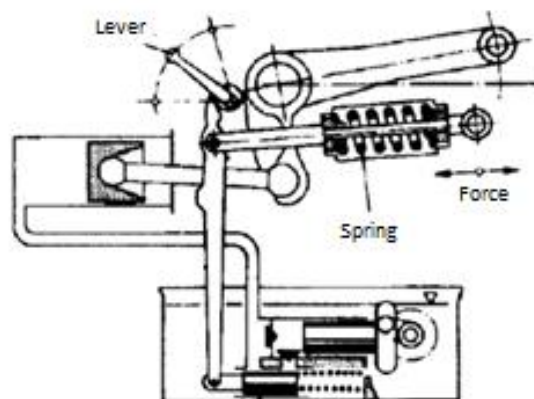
Top Link Sensing Mechanical Draft Control [9]
